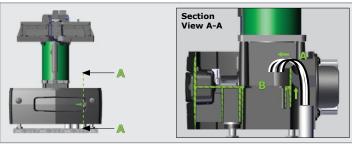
CABLE ROUTING FOR NEW INSTALLATIONS
